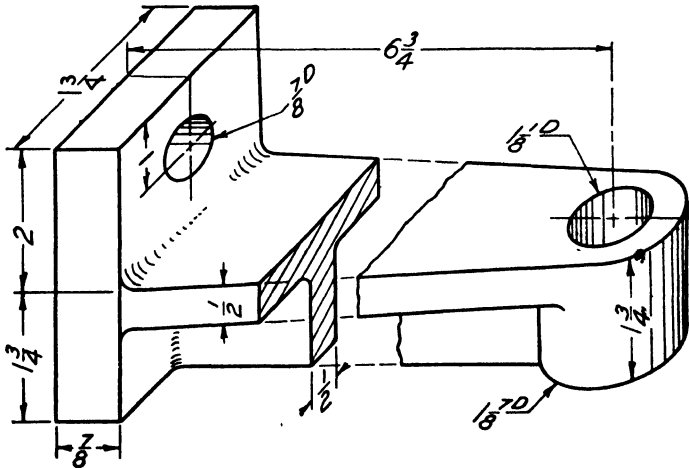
Prob. 154. Draw the necessary views of the bracket. Show a revolved section.
